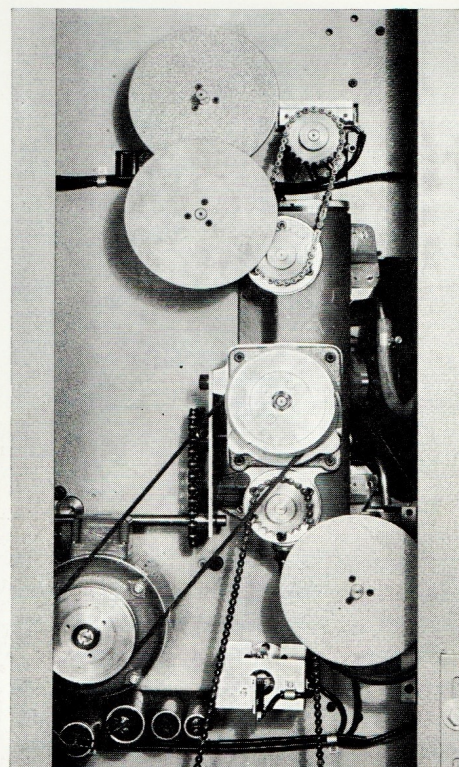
Location of the relative positions of the motor and drive mechanism.
